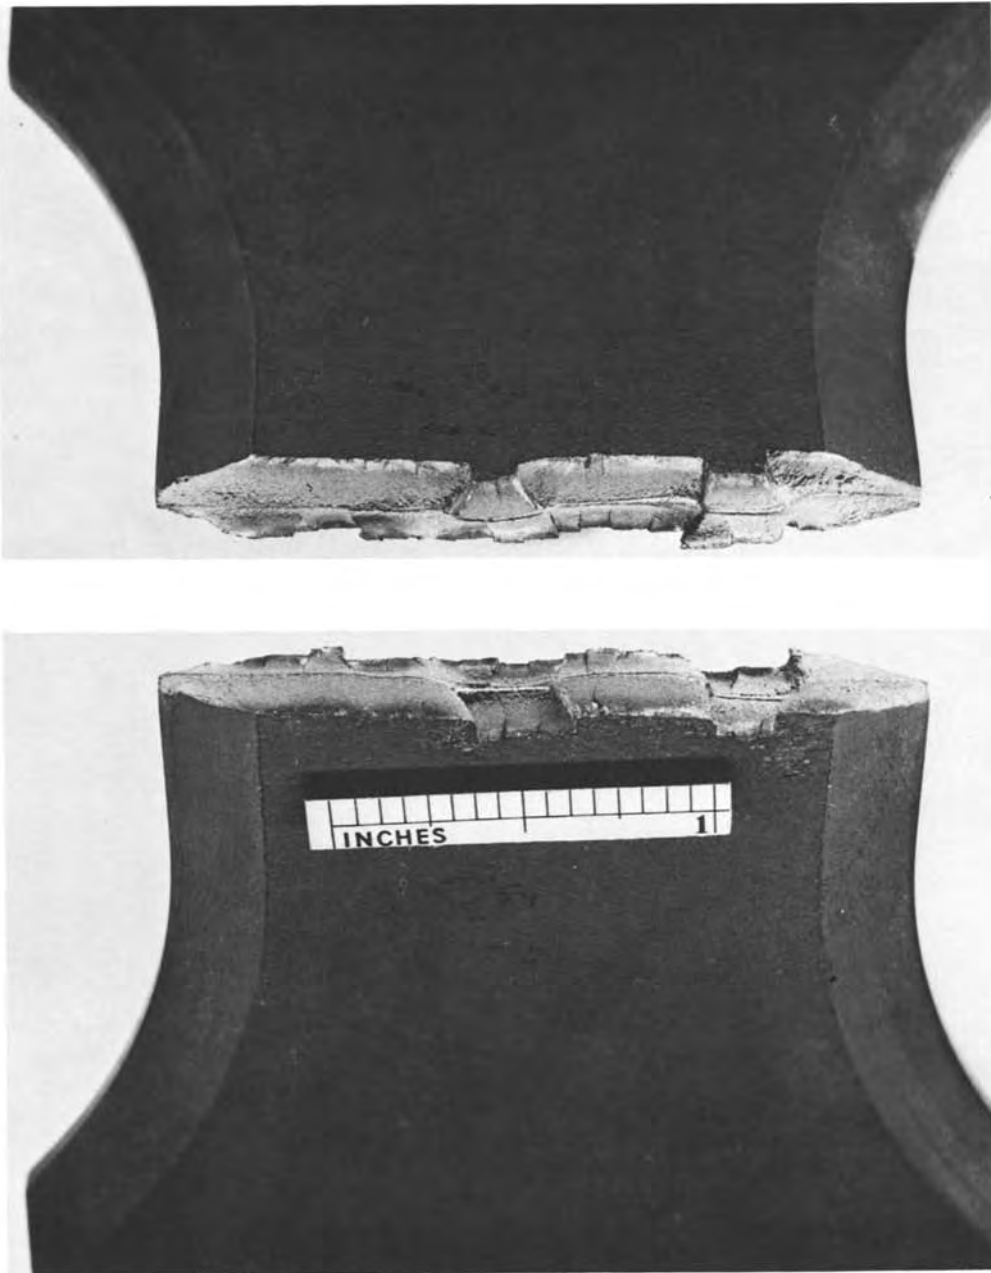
Reversed bending fatigue of a flat $\frac{1}{4}$ in. plate of a high-strength low-alloy steel test specimen, designed with tapered edges to prevent fatigue origin at the corners. Note the many separate origins on each side and the very thin final rupture region separating the two fatigue areas on each half. Many other fatigue cracks were present in the reduced section, for this was designed to have a relatively uniform stress in the reduced section.
